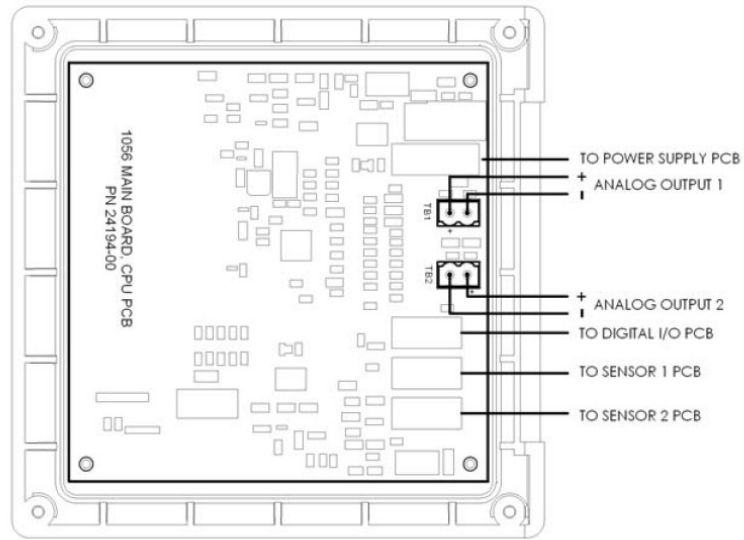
Output Wiring for Model 1056 Main PCB
